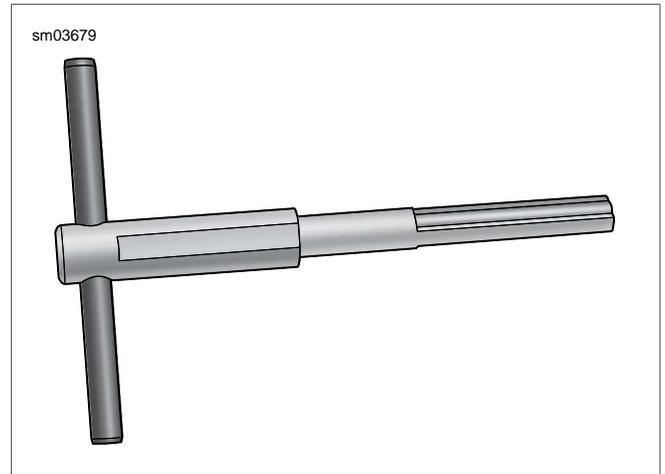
Ignition Switch Alignment Tool (HD-45962)
